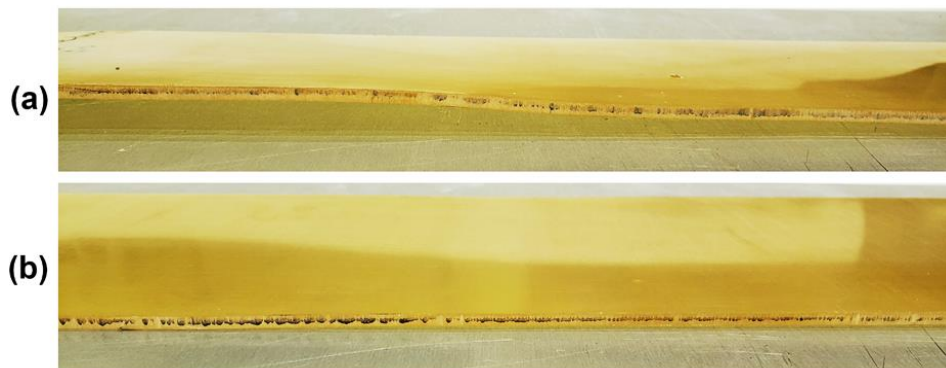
Edge view of a neat epoxy panel fabricated using the HP-RTM setup: (a) after demolding and prior to flattening (b) after flattening.
